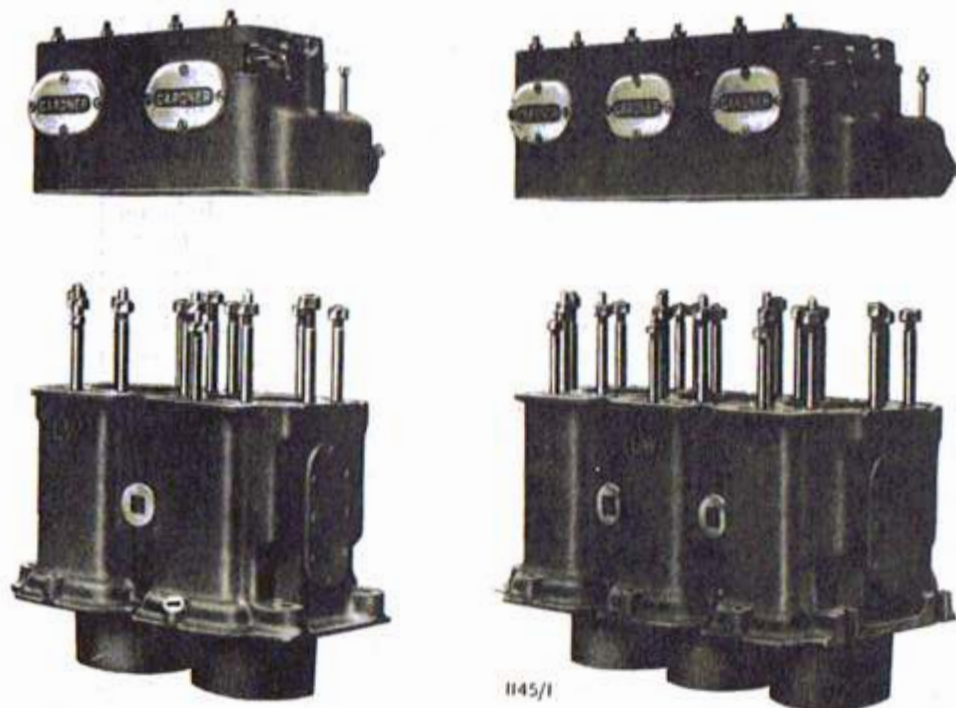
A TWO AND THREE-CYLINDER BLOCK WITH MATCHING HEADS
